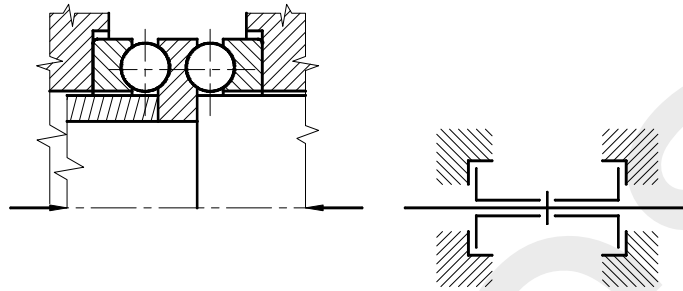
Bearing retaining of a double row thrust ball bearing
